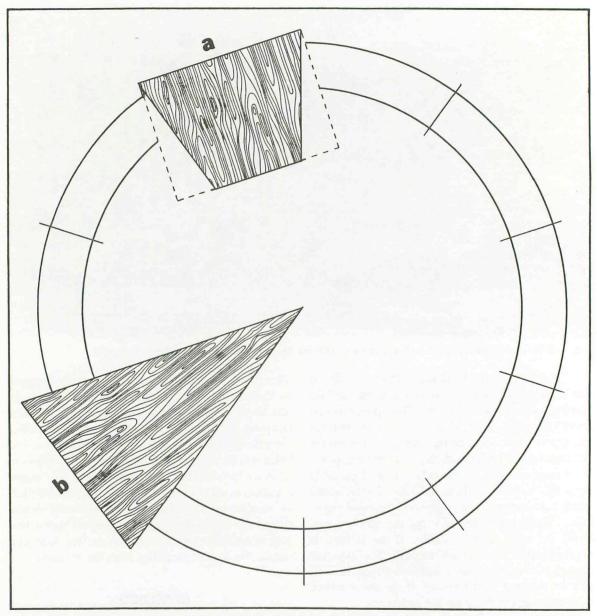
Layout for side and top of "bongo drum" box, top view. (A) shape of side pieces, (B) plan for wedge-shaped top pieces.
